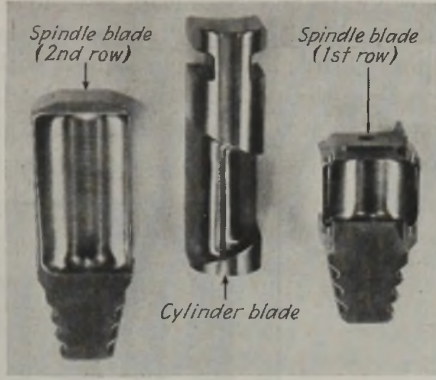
Impulse blading for Allis-Chalmers turbine.
